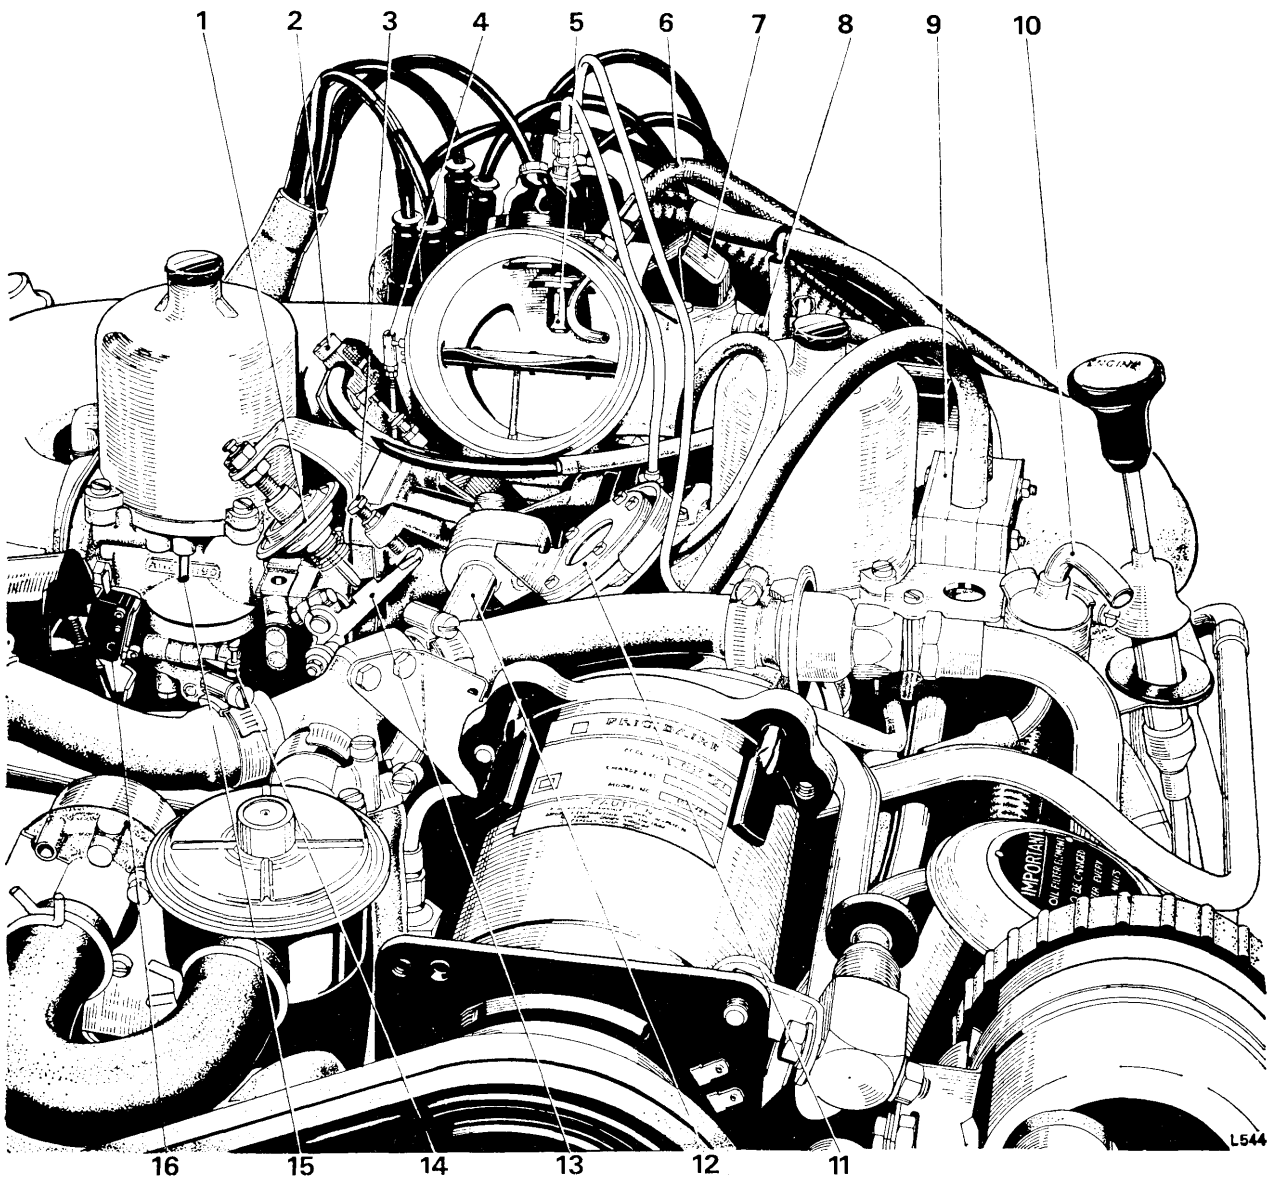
VIEW OF CARBURETTERS (Later Cars)
